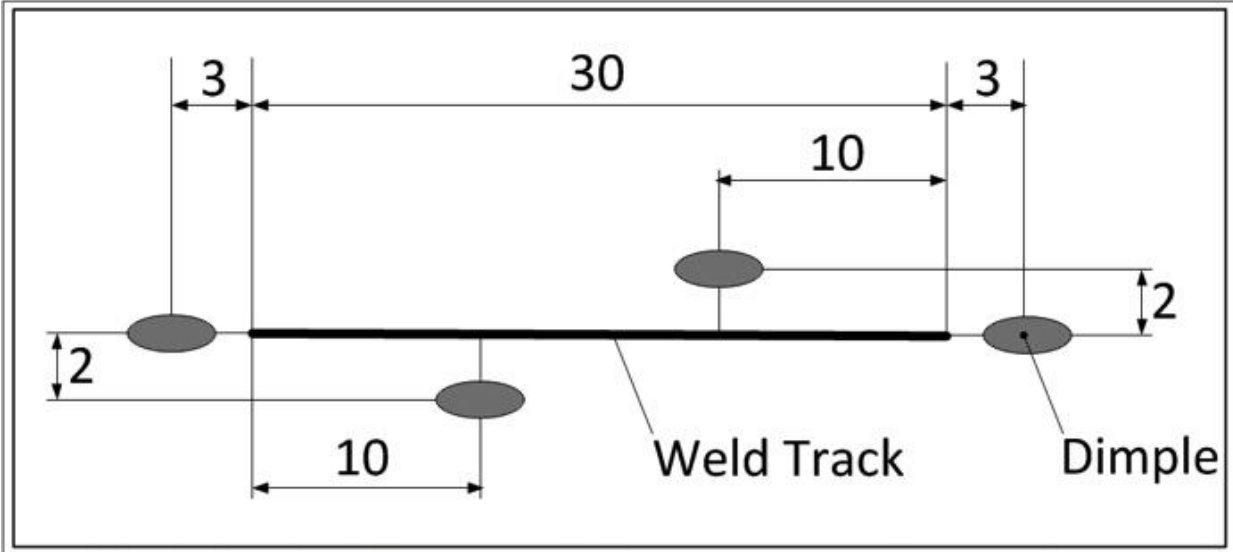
Configuration of the samples used for the confirmation runs with the relative position of the four dimples close to the welded bead (top view).
